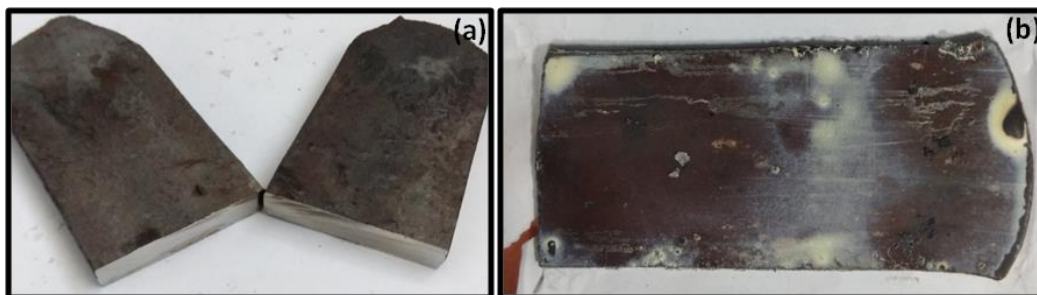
Actual photos of the steel specimen (a) before rolling, and (b) after rolling.
